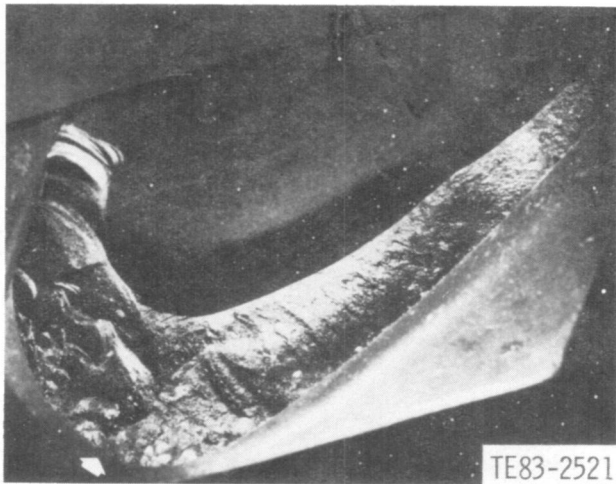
Blade fracture propagating along pressure side of airfoil.
